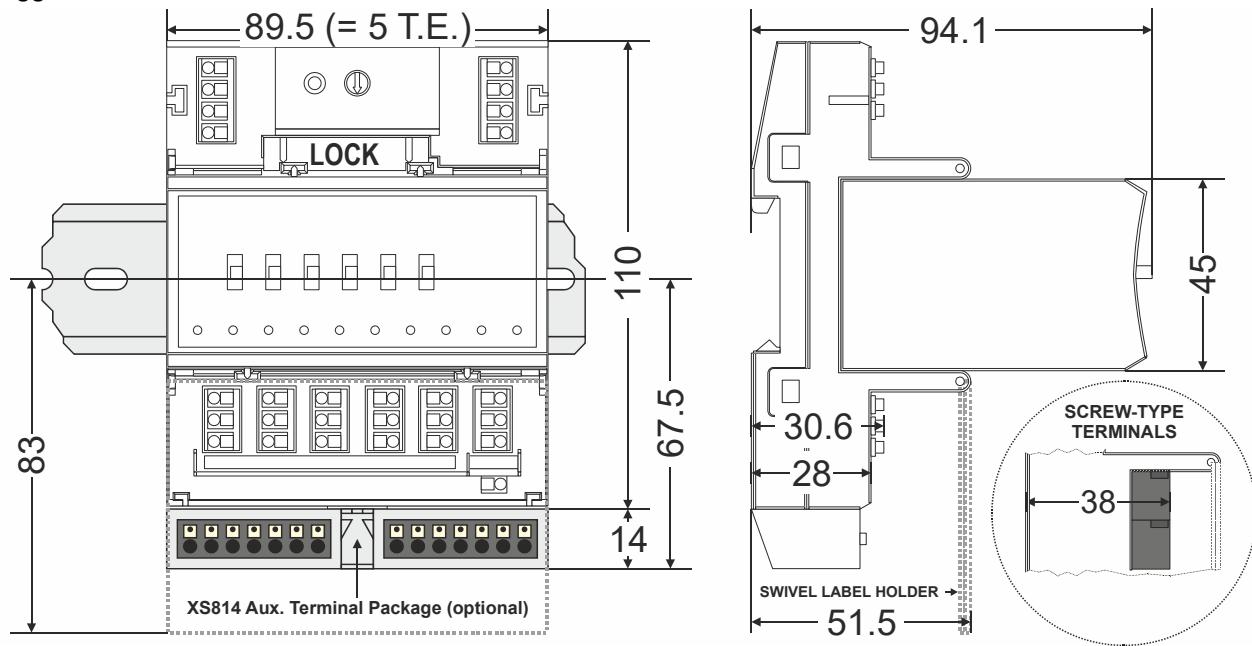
Pluggable I/O modules (shown with manual overrides), including XS814 Aux. Terminal Package, dimensions (in mm)
